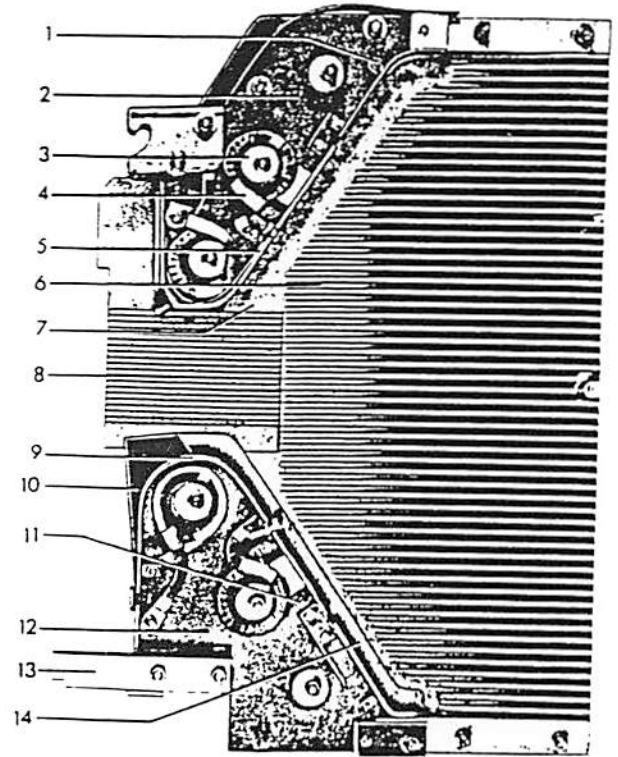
(8040408) Interrupter Assembly with Muffer and Side Removed
